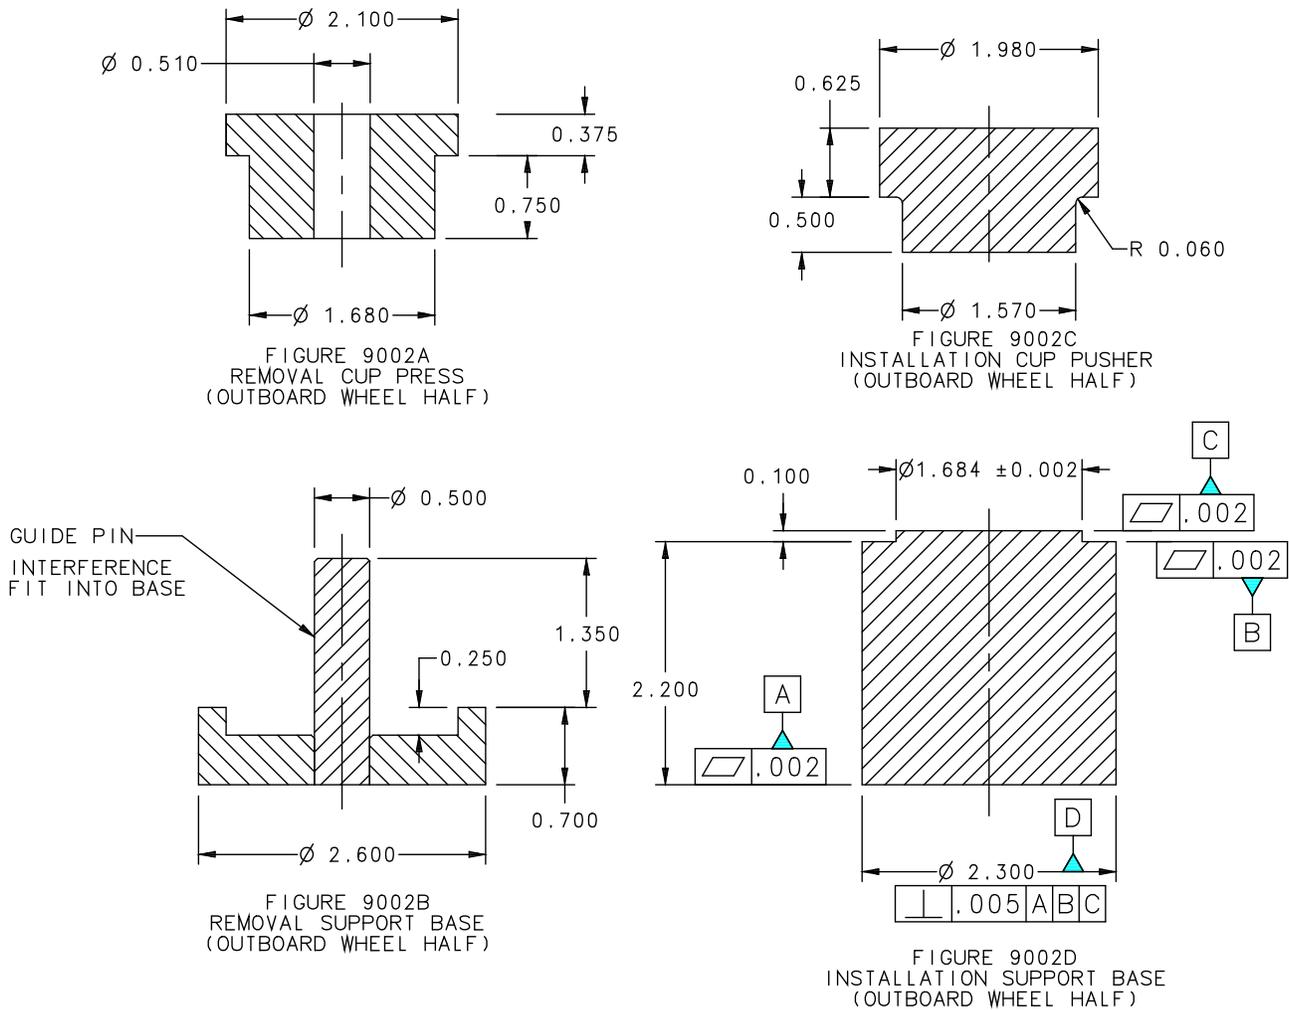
Outboard Wheel Half Bearing Cup Tools
